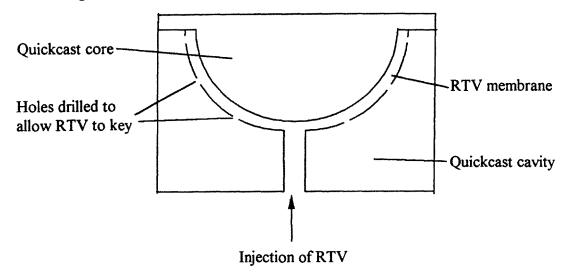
Cross section diagram showing how an RTV silicone rubber membrane mould is made
